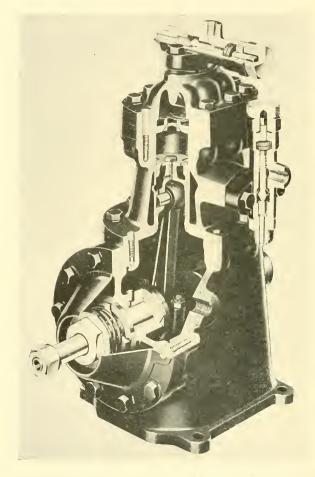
CUTAWAY VIEW OF SERVEL COMPRESSOR SHOWING MOVING PARTS AND SYLPHON PACKING.
